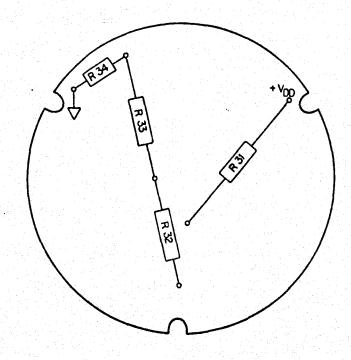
The oscillator printed circuit board (bottom view) of the Utah Pulse-to-Pulse Rocketsonde.
